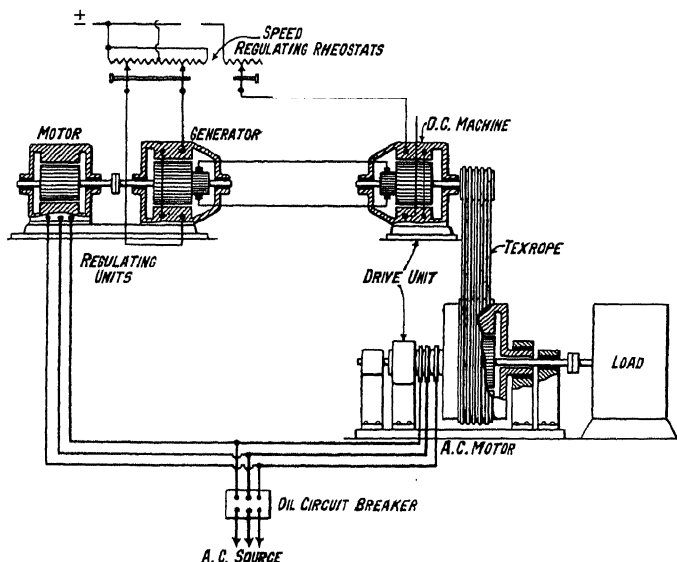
Speed control of induction motor by means of a variable-speed D.C. motor driving the stator of the A.C. machine.
